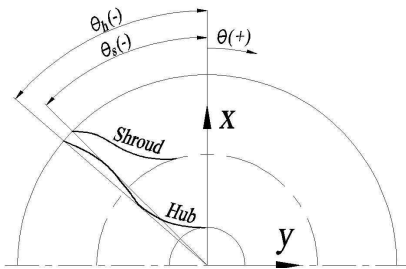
Cartesian coordinate and wrap angle at the impeller inlet
